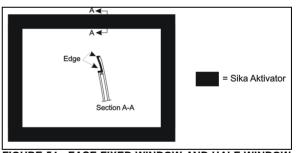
FACE FIXED WINDOW AND HALF-WINDOW – SIKA AKTIVATOR
